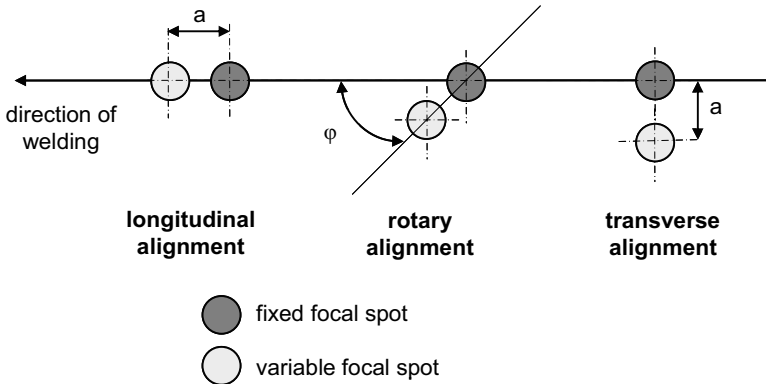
Relative focal position in Twin Spot welding with regards to the direction of welding, ϕ is the inclination angle and a is the relative distance of the two foci
